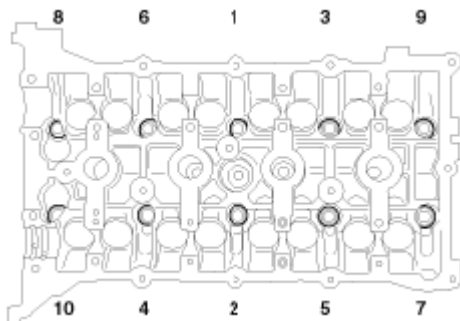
Identifying Cylinder Head Bolts Tighten Sequence
